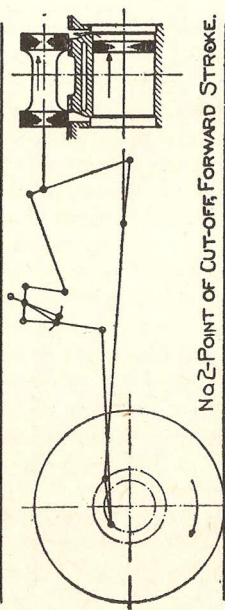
and 5 represent the Baker Valve Gear as arranged for piston valves inside admission.
